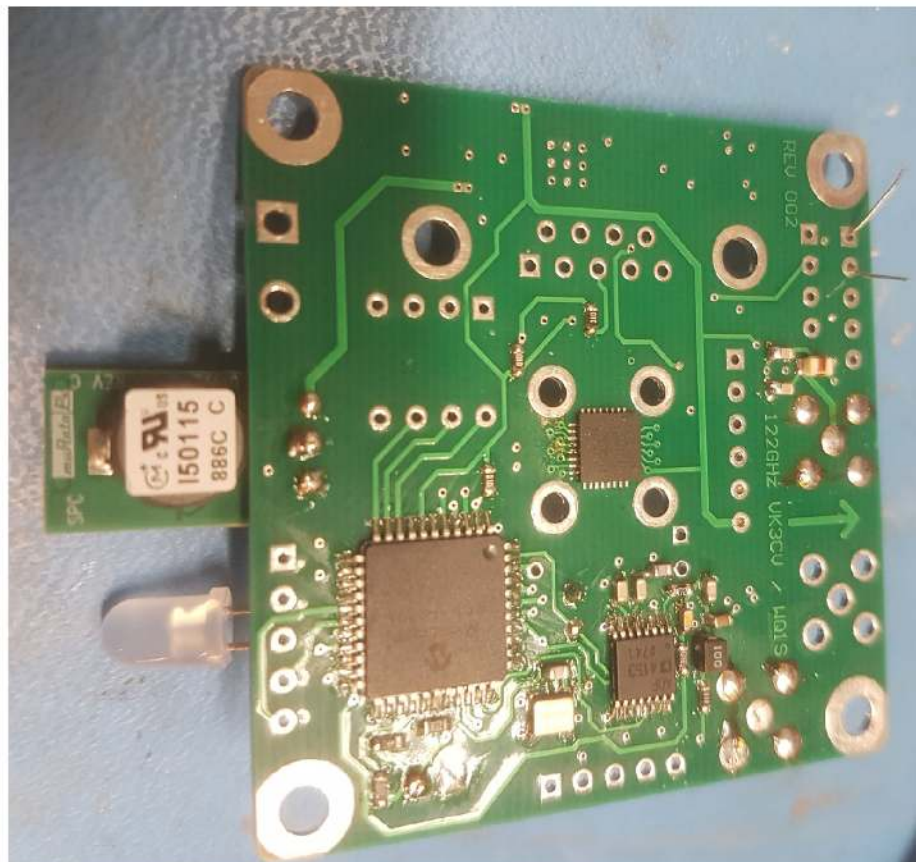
PCB front side, note the TRA\_120 chip in the center square hole pattern.
